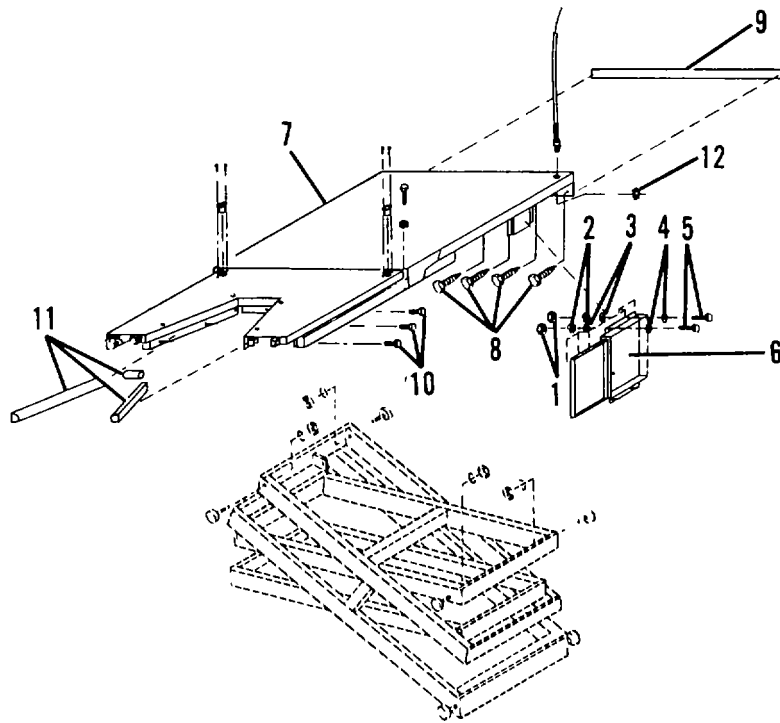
Platform Mounting (Sheet 1 of 2).
